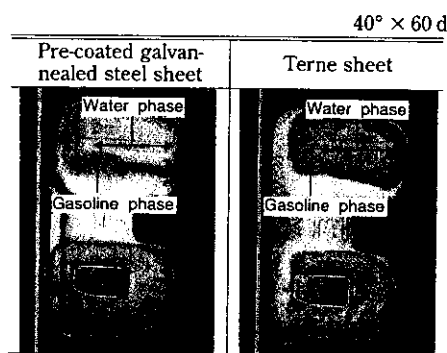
Appearance of fuel tank after corrosion test with aggressive gasoline
